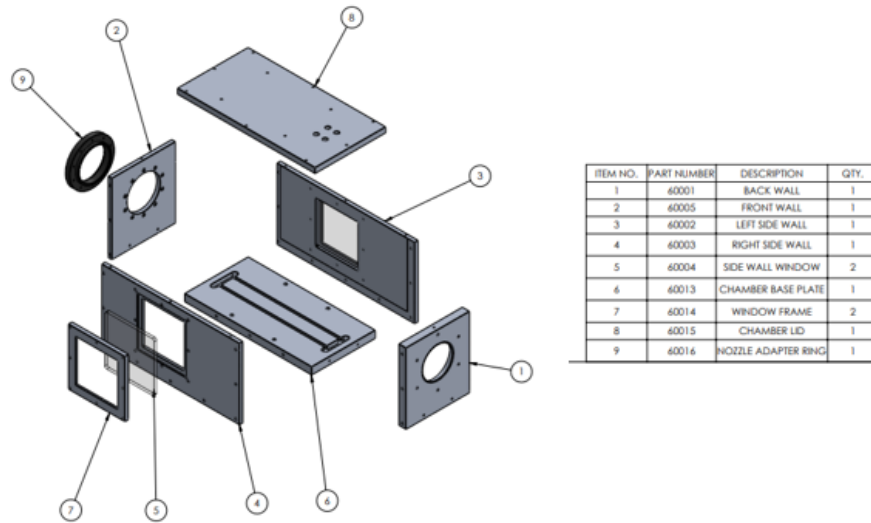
This is the exploded view of the Test Chamber with each of its components labeled and listed
